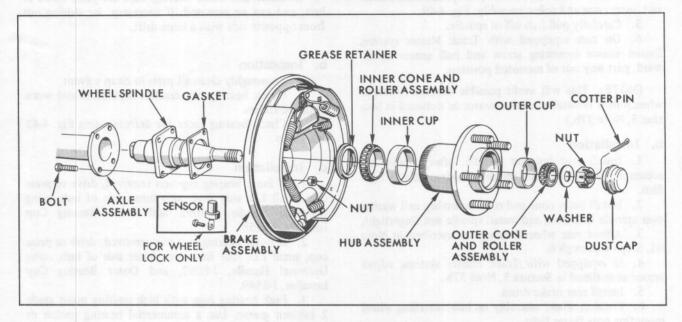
Rear Wheel Disassembled - Eldorado
